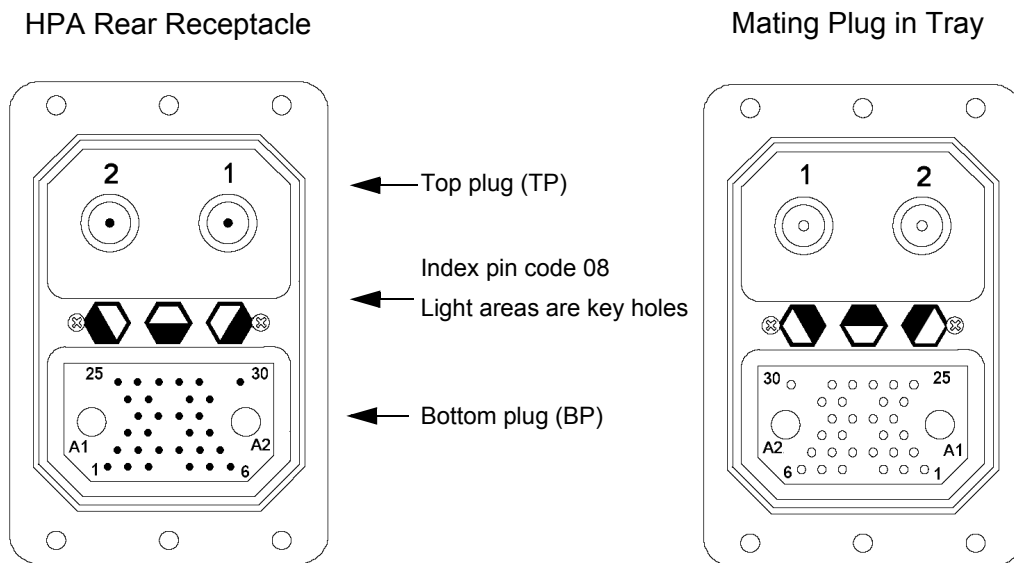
HPA Receptacle, Face View of Engaging End. Index Code is 08
